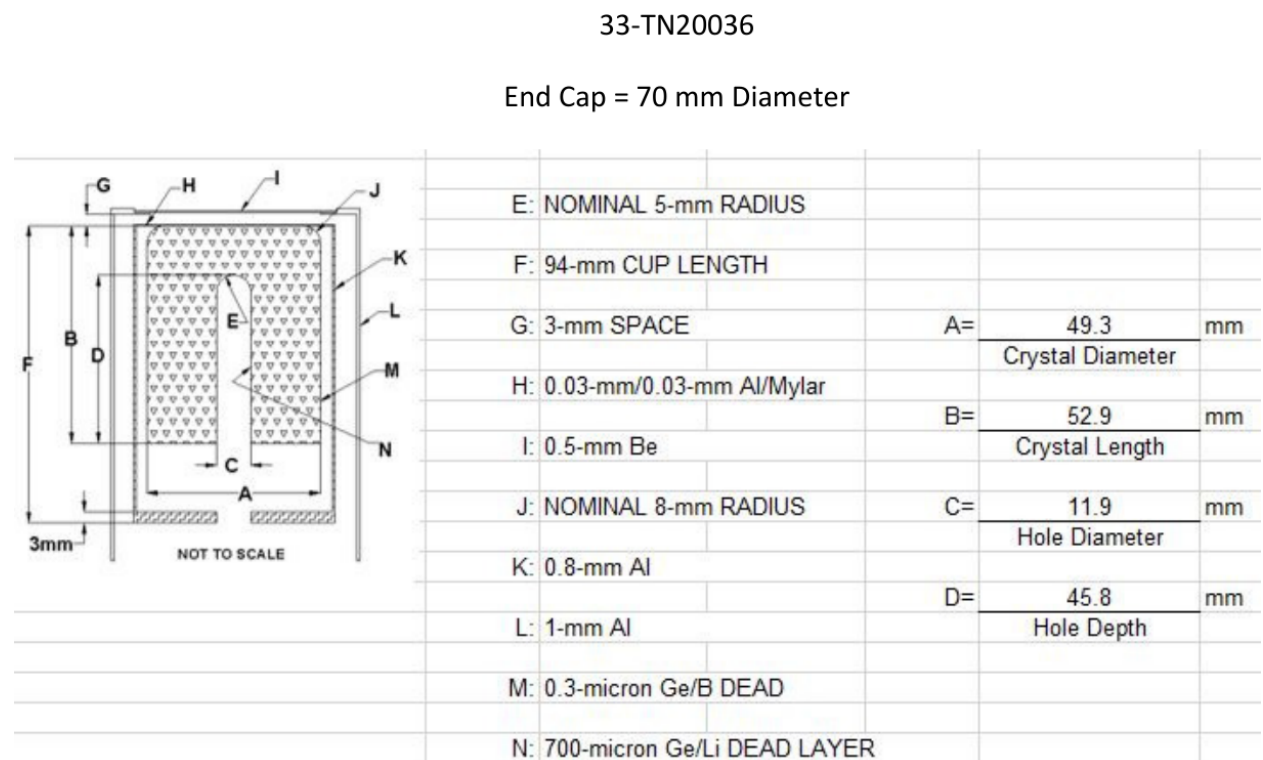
The manufacture dimensions of the G11 HPGe detector used.
